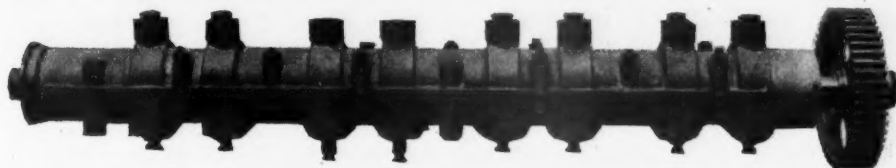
COMPLETE CAMSHAFT AND HOUSING
